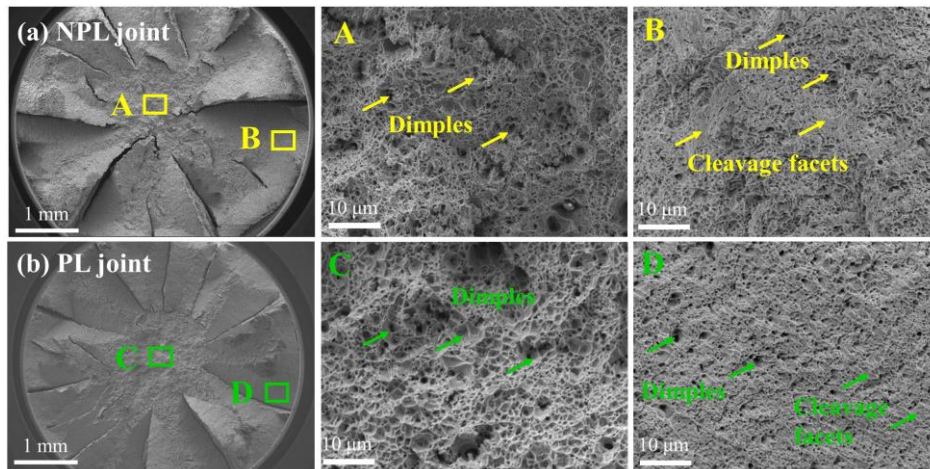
Fracture surface of the representative joint (PL joint)
